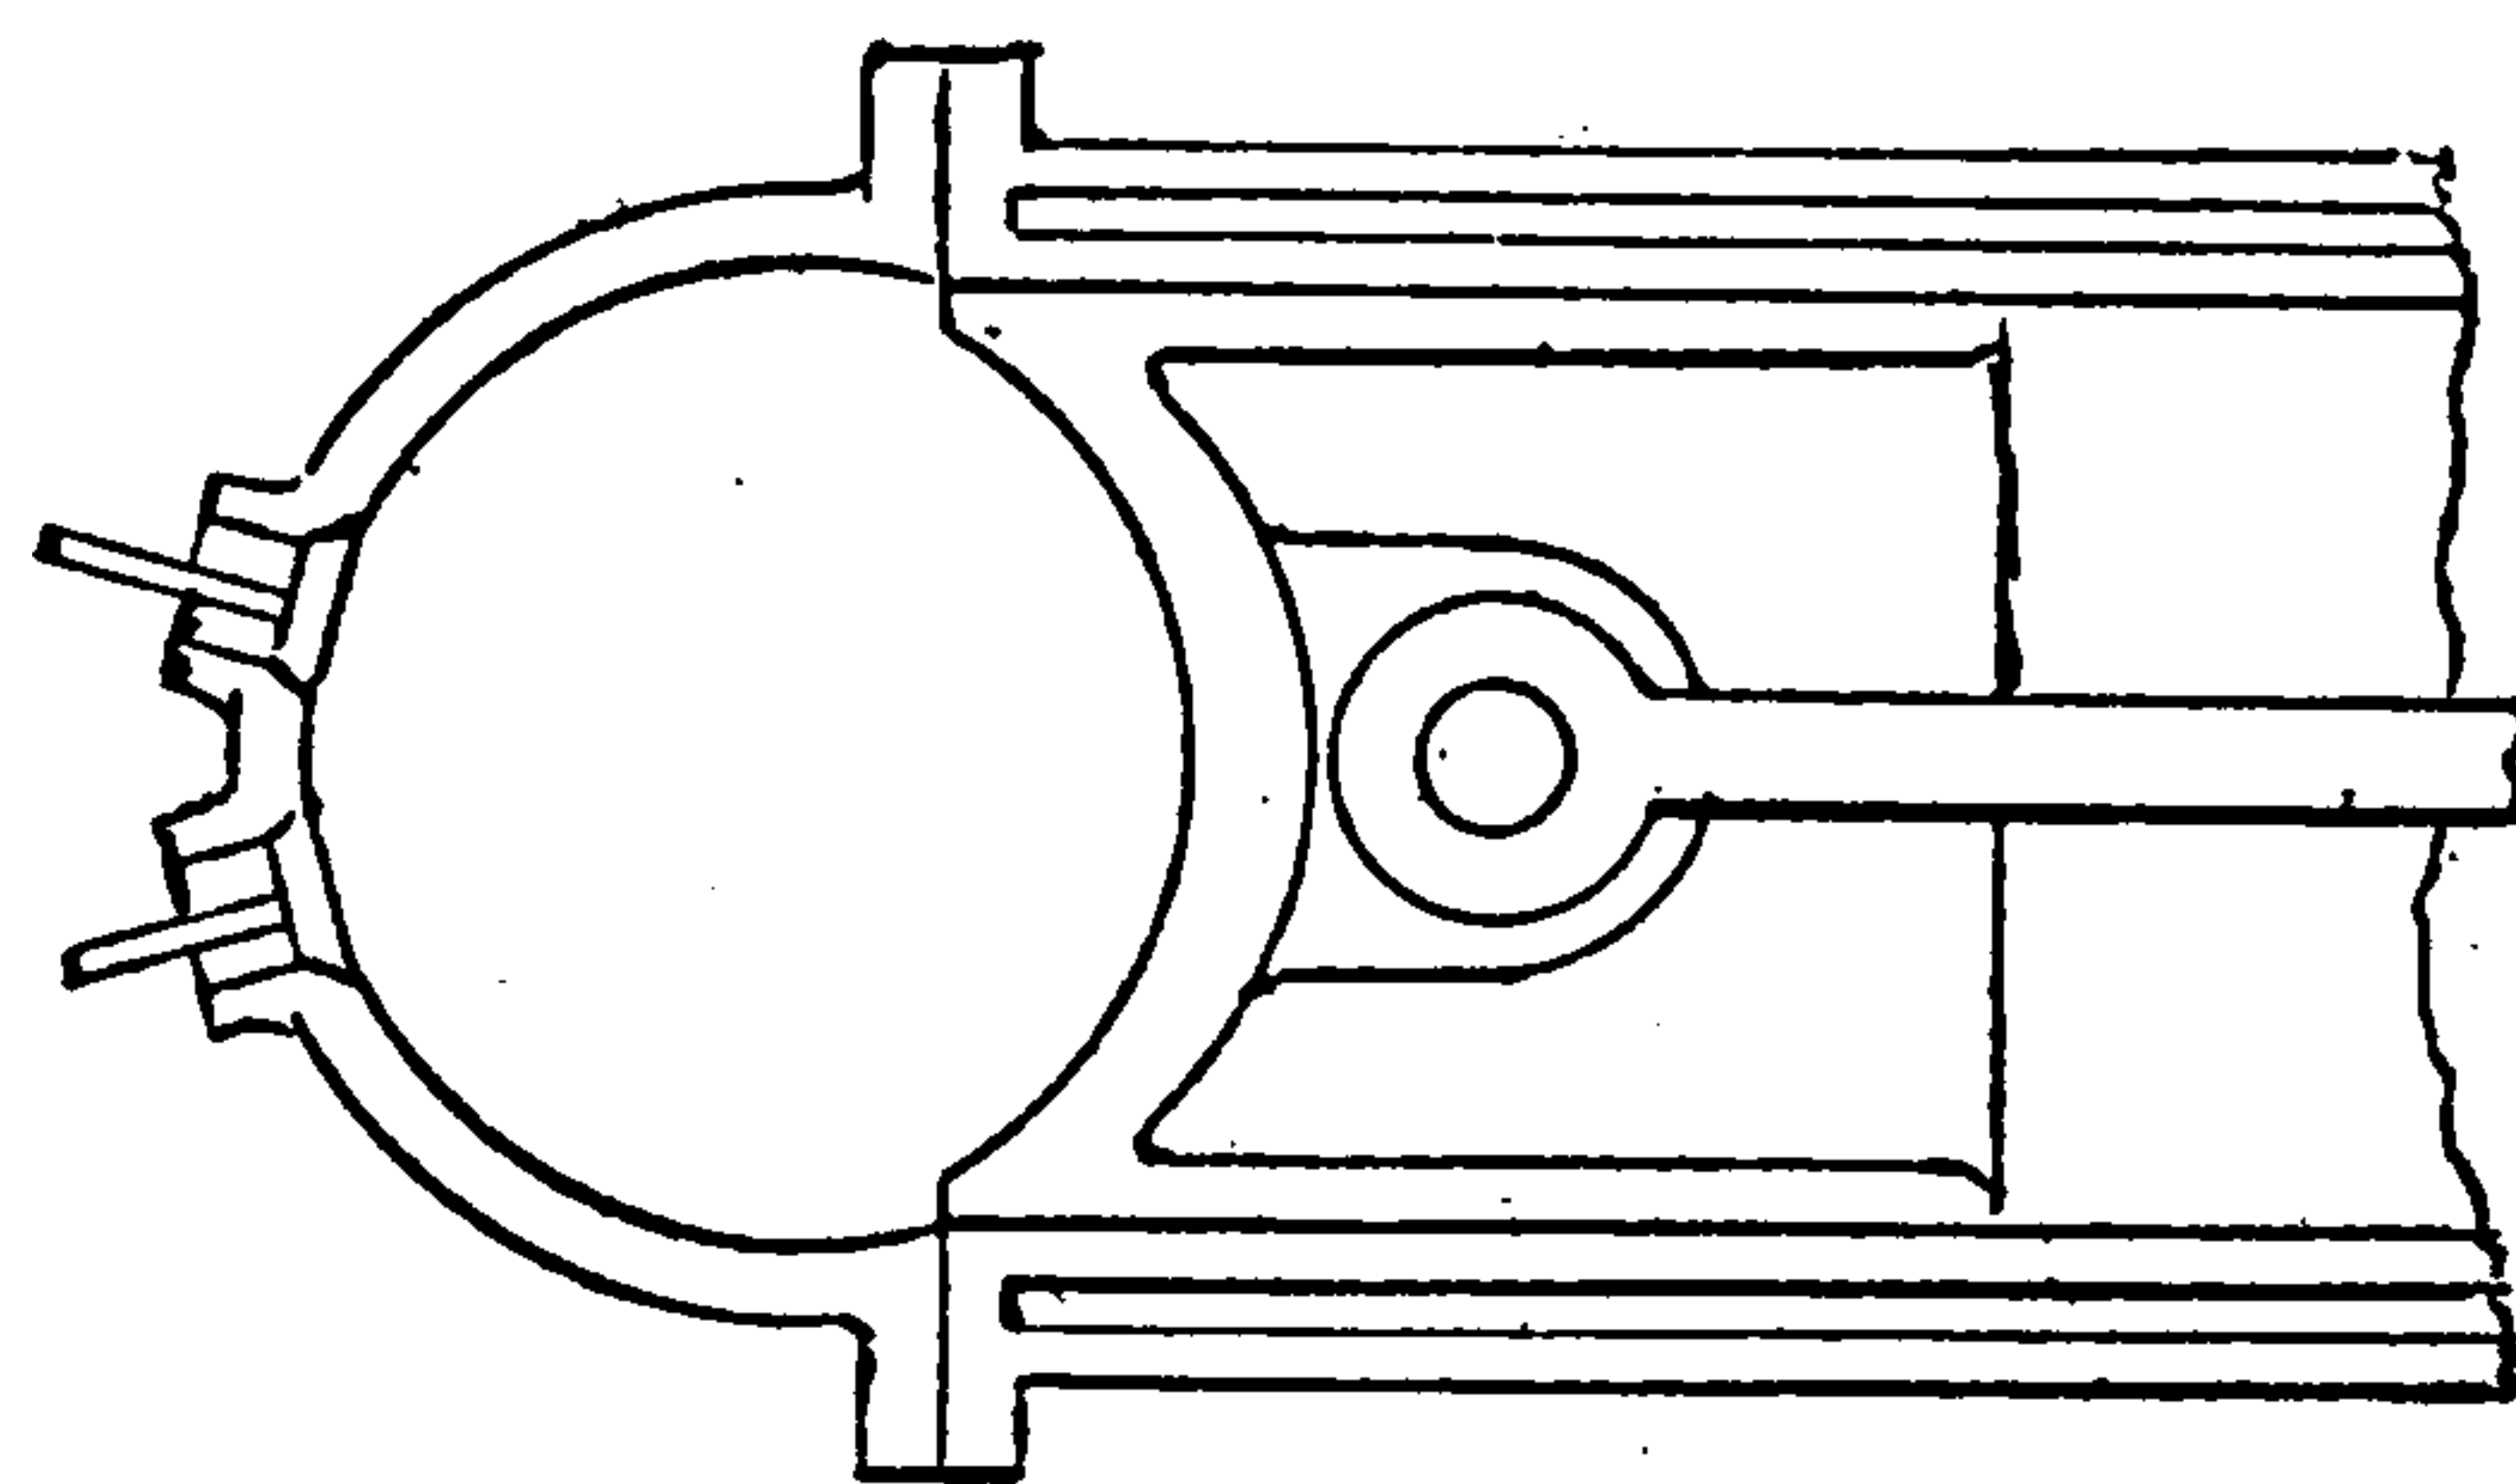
ENLARGED COMBUSTION CHAMBER.
